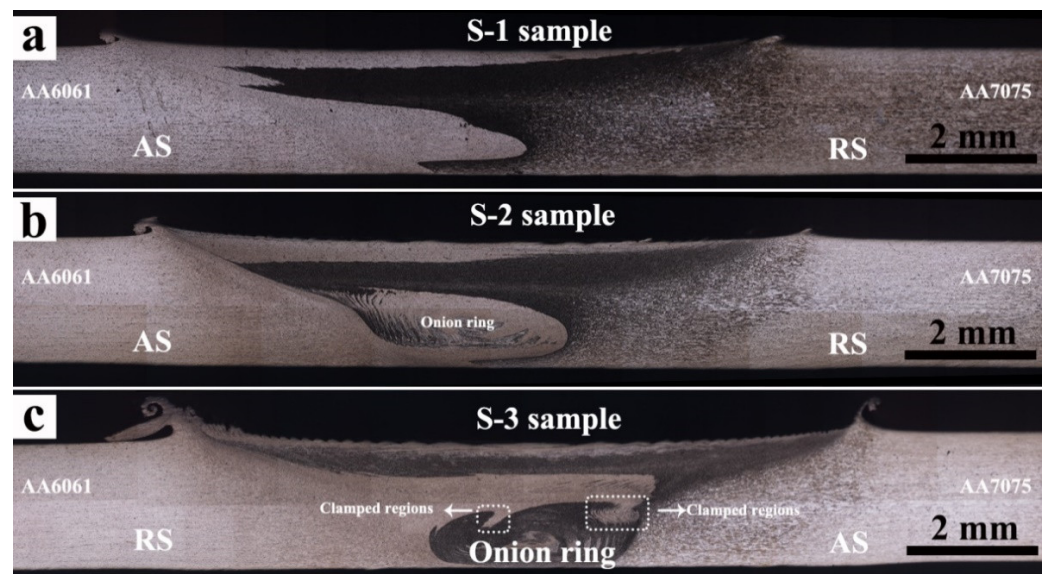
The cross-sections of dissimilar AA6061/AA7075 joints fabricated via (a) single-pass FSW, and multiple-pass FSW using (b) the same and (c) the opposite welding direction.
